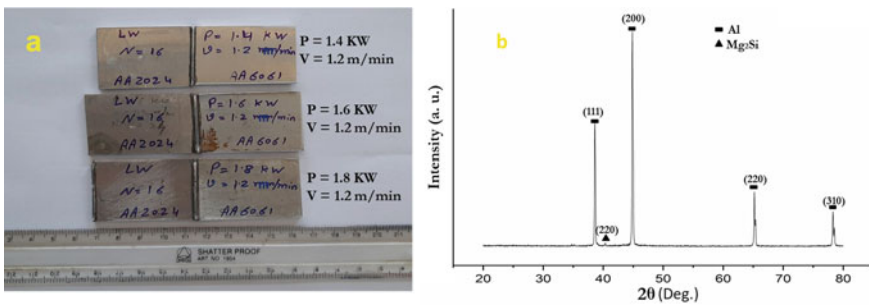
a Surface morphologies of the welded samples b XRD analysis of AA2024-AA6061 welded samples
